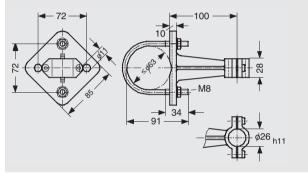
/109 Instrument bracket form A, wall or pipe mounting, dimensions
